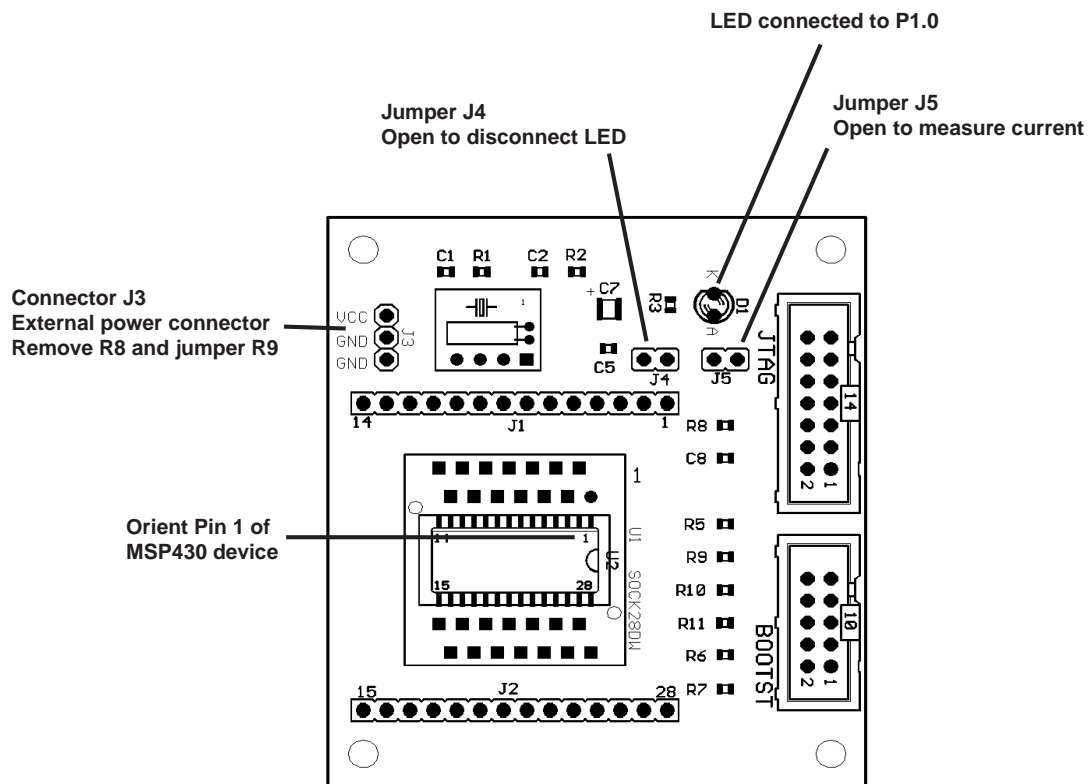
MSP-TS430DW28 Target Socket Module, PCB
